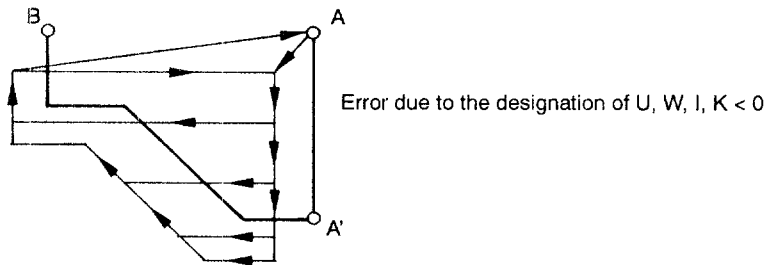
In-feed Caused by Wrong Sign Used for U, W, I, and K
